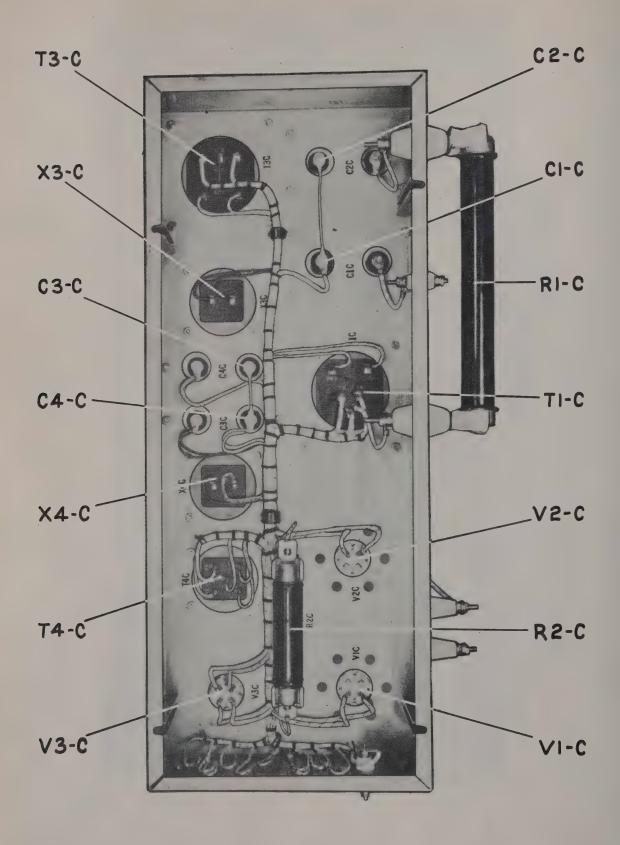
1600/400-Volt Power Supply—Bottom View
